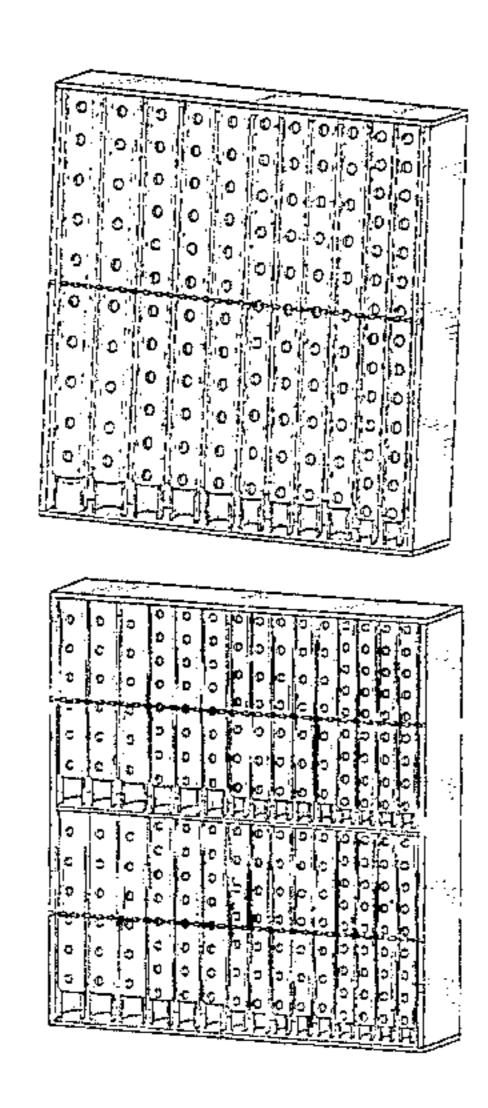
is a rear view of the embodiment of the present invention illustrated in FIG. 15;
